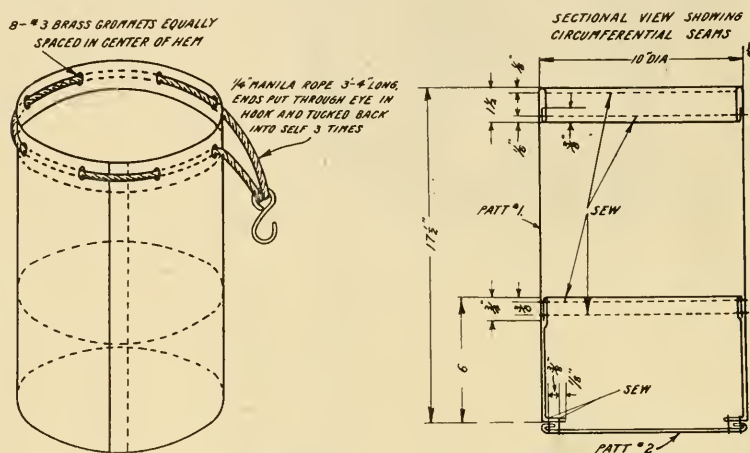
PLATE XII.—Construction of U. S. Army Standard Hand Bag.
